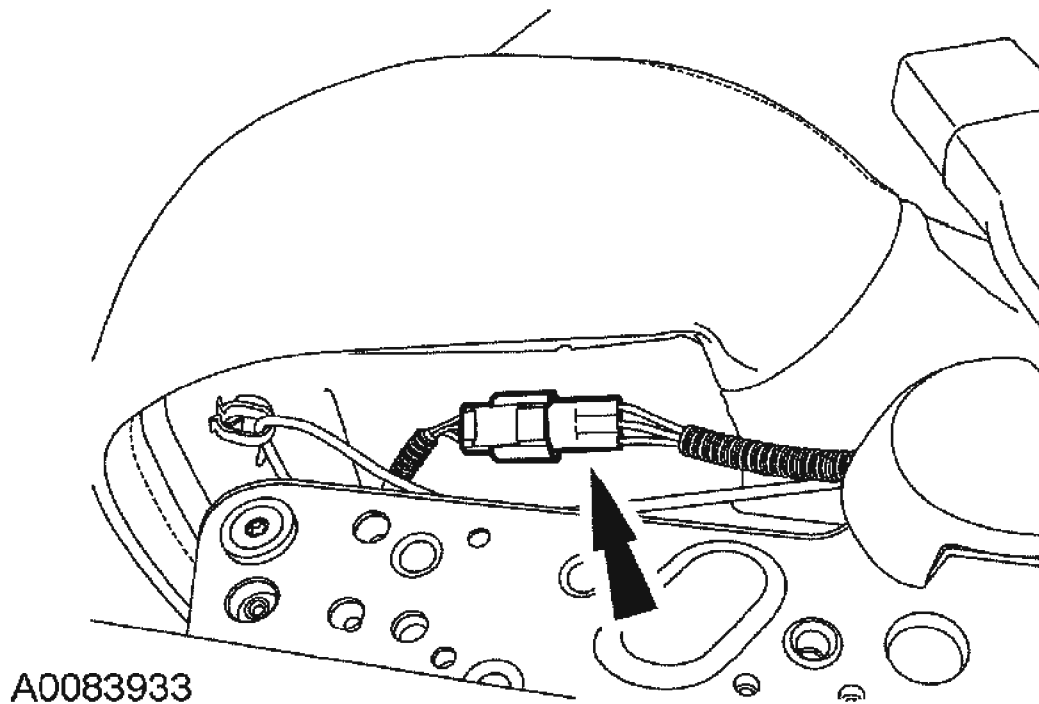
Connecting Belt Tension Sensor And Attaching Connector To Cushion Pan
